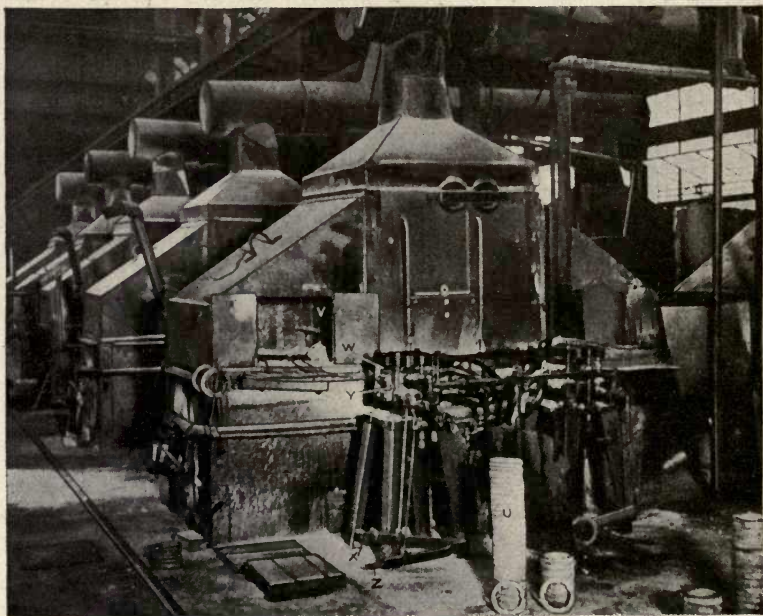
Battery of Cyanide Furnaces—Special Quenching Machines for Clutch Rings in Foreground. ("Machinery.")
